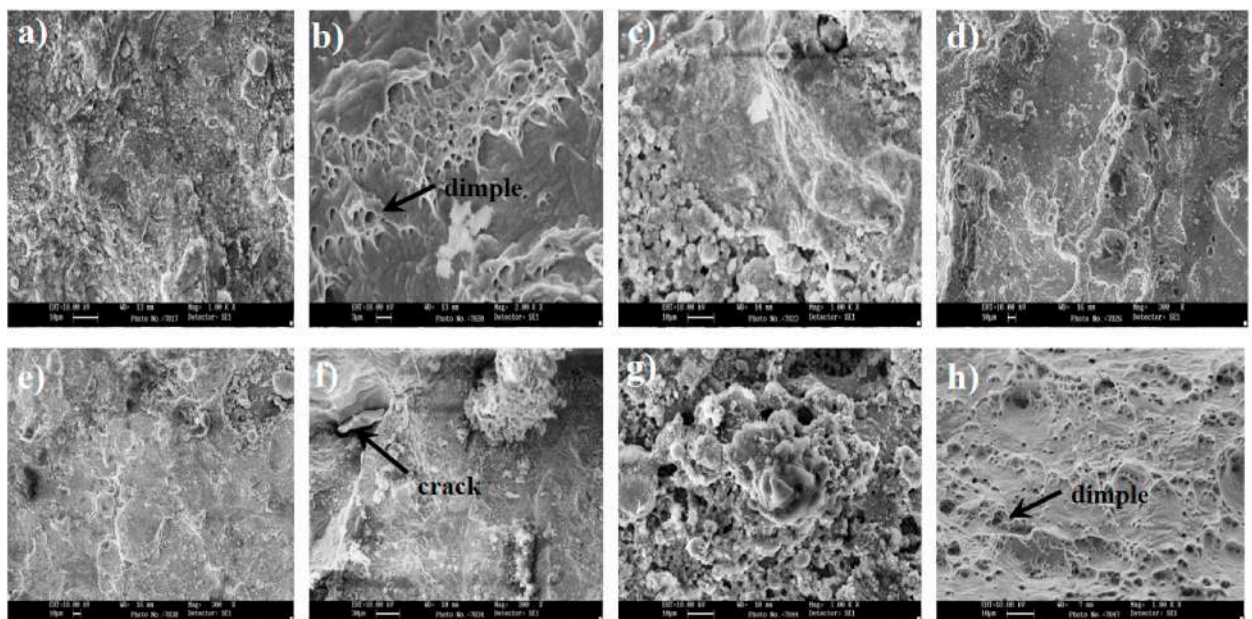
Weld samples fracture appearance of tensile tests samples for Inconel 600 side for Exp. No. of a) 2, b)1, c)23, d)20, for duplex stainless steel side for Exp. No. of a) 2, b)1, c)23, d)20.
